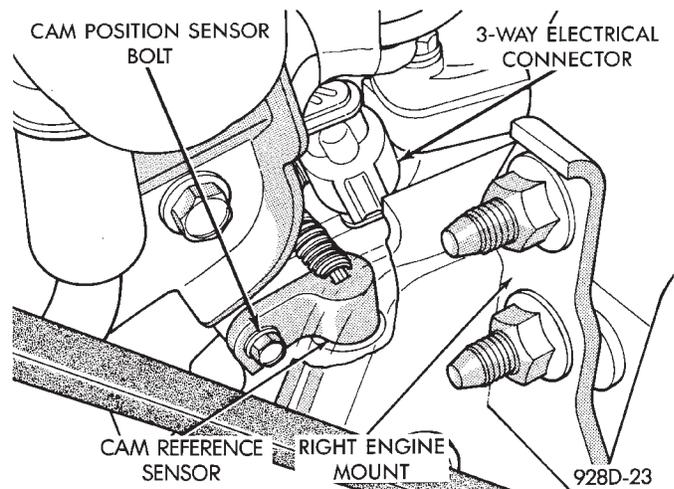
Camshaft Sensor Location—3.3L and 3.8L Engine
